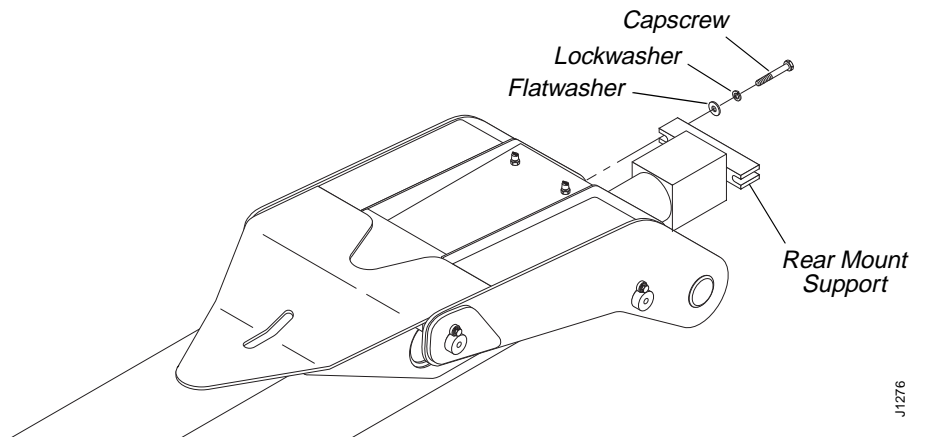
Rear Boom Extension Cylinder Mount Support Installation
